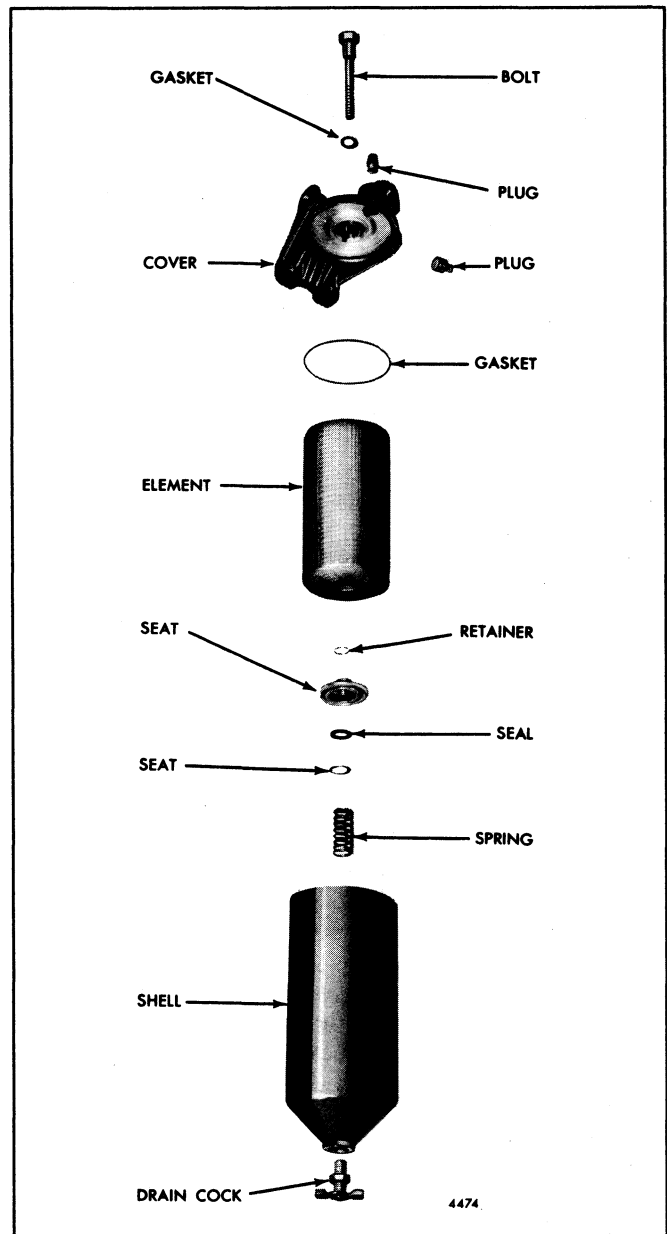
Fuel Strainer Details and Relative Location of Parts
